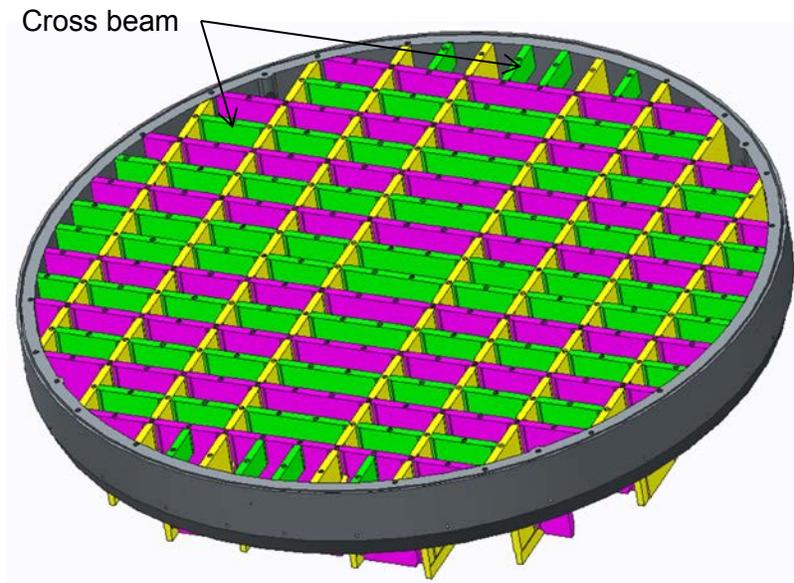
Main/secondary support beam and cylinder to cross beam weld
